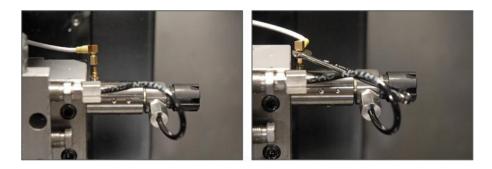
Tightening of power cable to TriboMAM body with 5/32 inch wrench.
